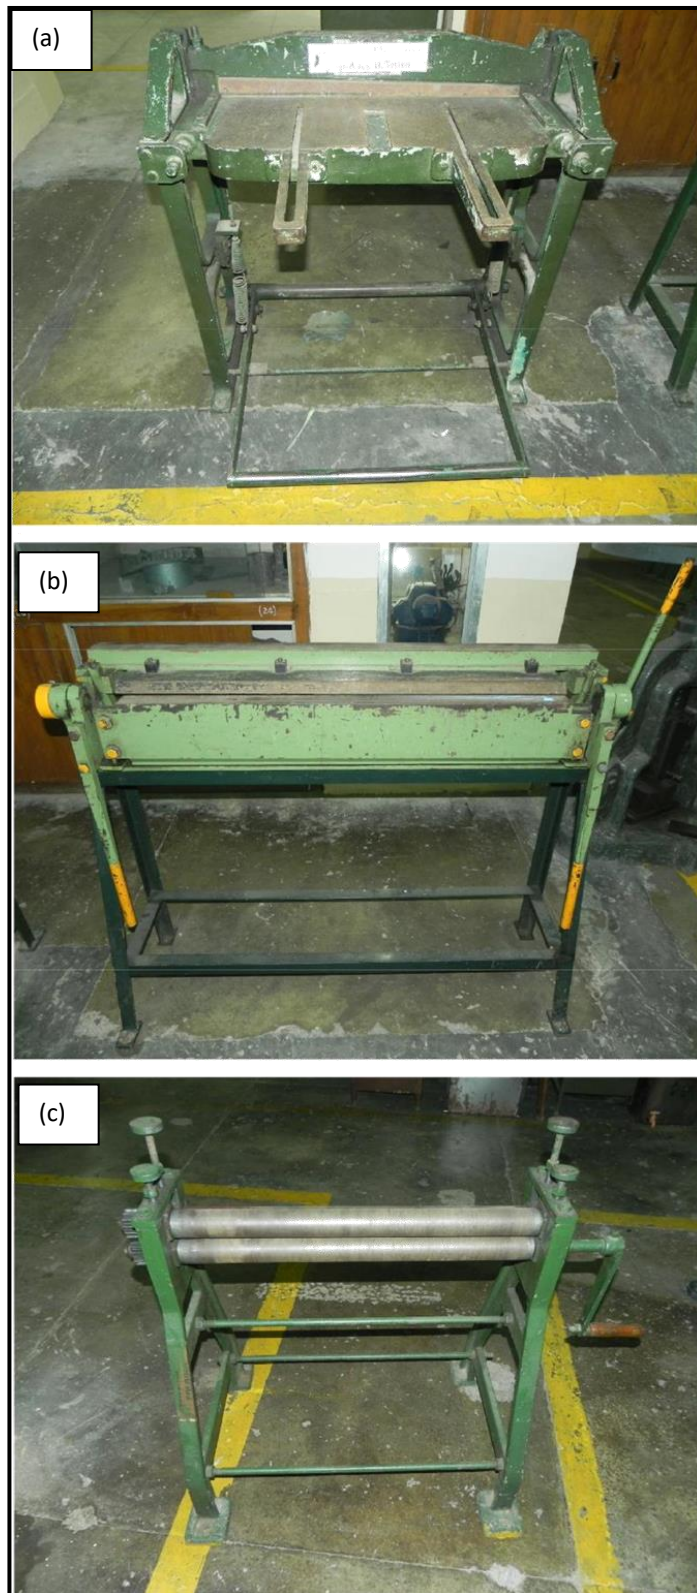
Some of the apparatus available in engineering metallurgy lab to perform sheet metal forming (a) Shearing equipment (b) Bending equipment (c) Folding equipment
